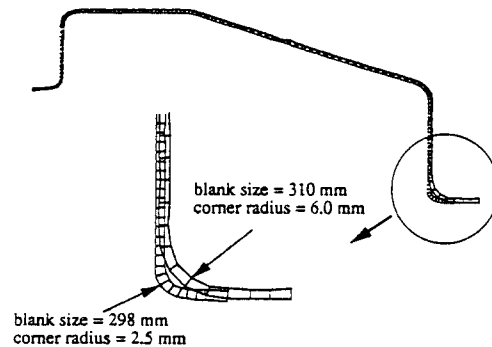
Final drawn shell with different blank sizes and corner radii.
